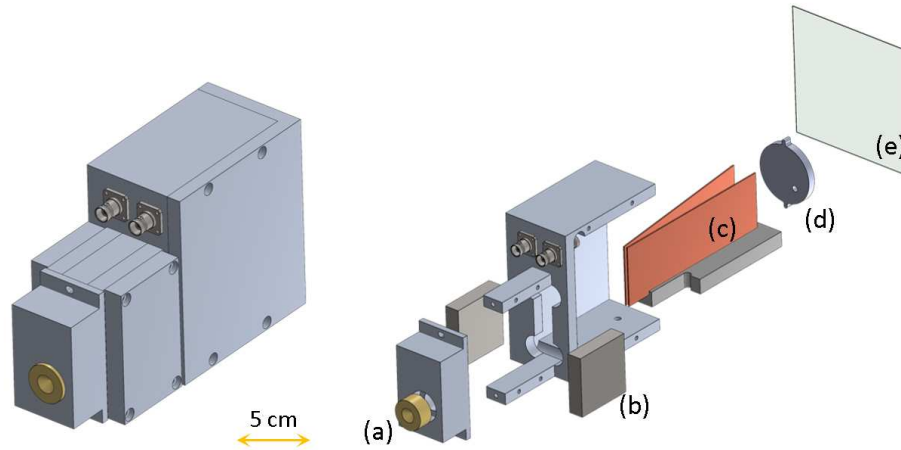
Exploded view of the Thomson parabola spectrometer: (a) Pinhole, (b) Magnets, (c) Wedge electrodes, (d) rear alignment pinhole, (e) detection media
